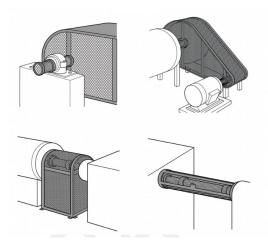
EXAMPLES OF ROTATING SHAFT, MOTOR COUPLING AND DRIVE PULLEY GUARDING
